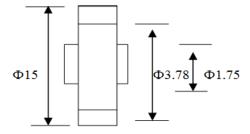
casting Component of Gear blank from Jobbing Foundry
